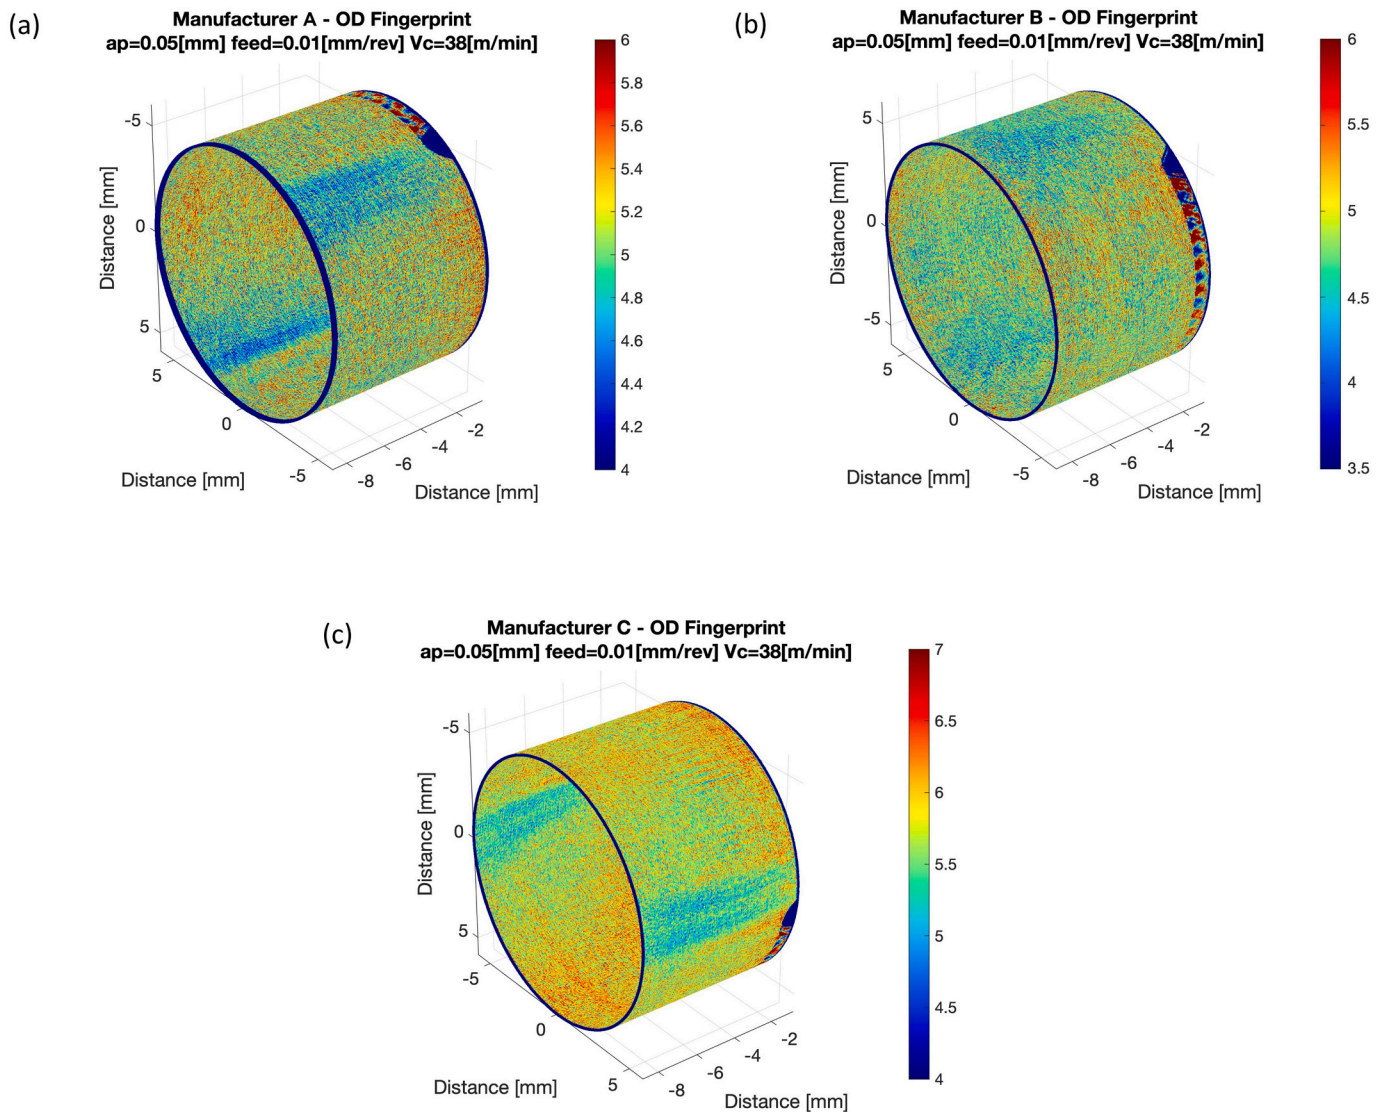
OD turning fingerprint reconstruction (FL) of the neck for all forging manufacturers A, B and C, $a_p = 0.05$ [mm], $feed = 0.01$ [mm/rev] and $V_c = 38$ [m/min] test conditions. 3D fingerprint reconstruction of the machined surface is depicted. The longitudinal axis of the cylinders is aligned with the RD axis.
